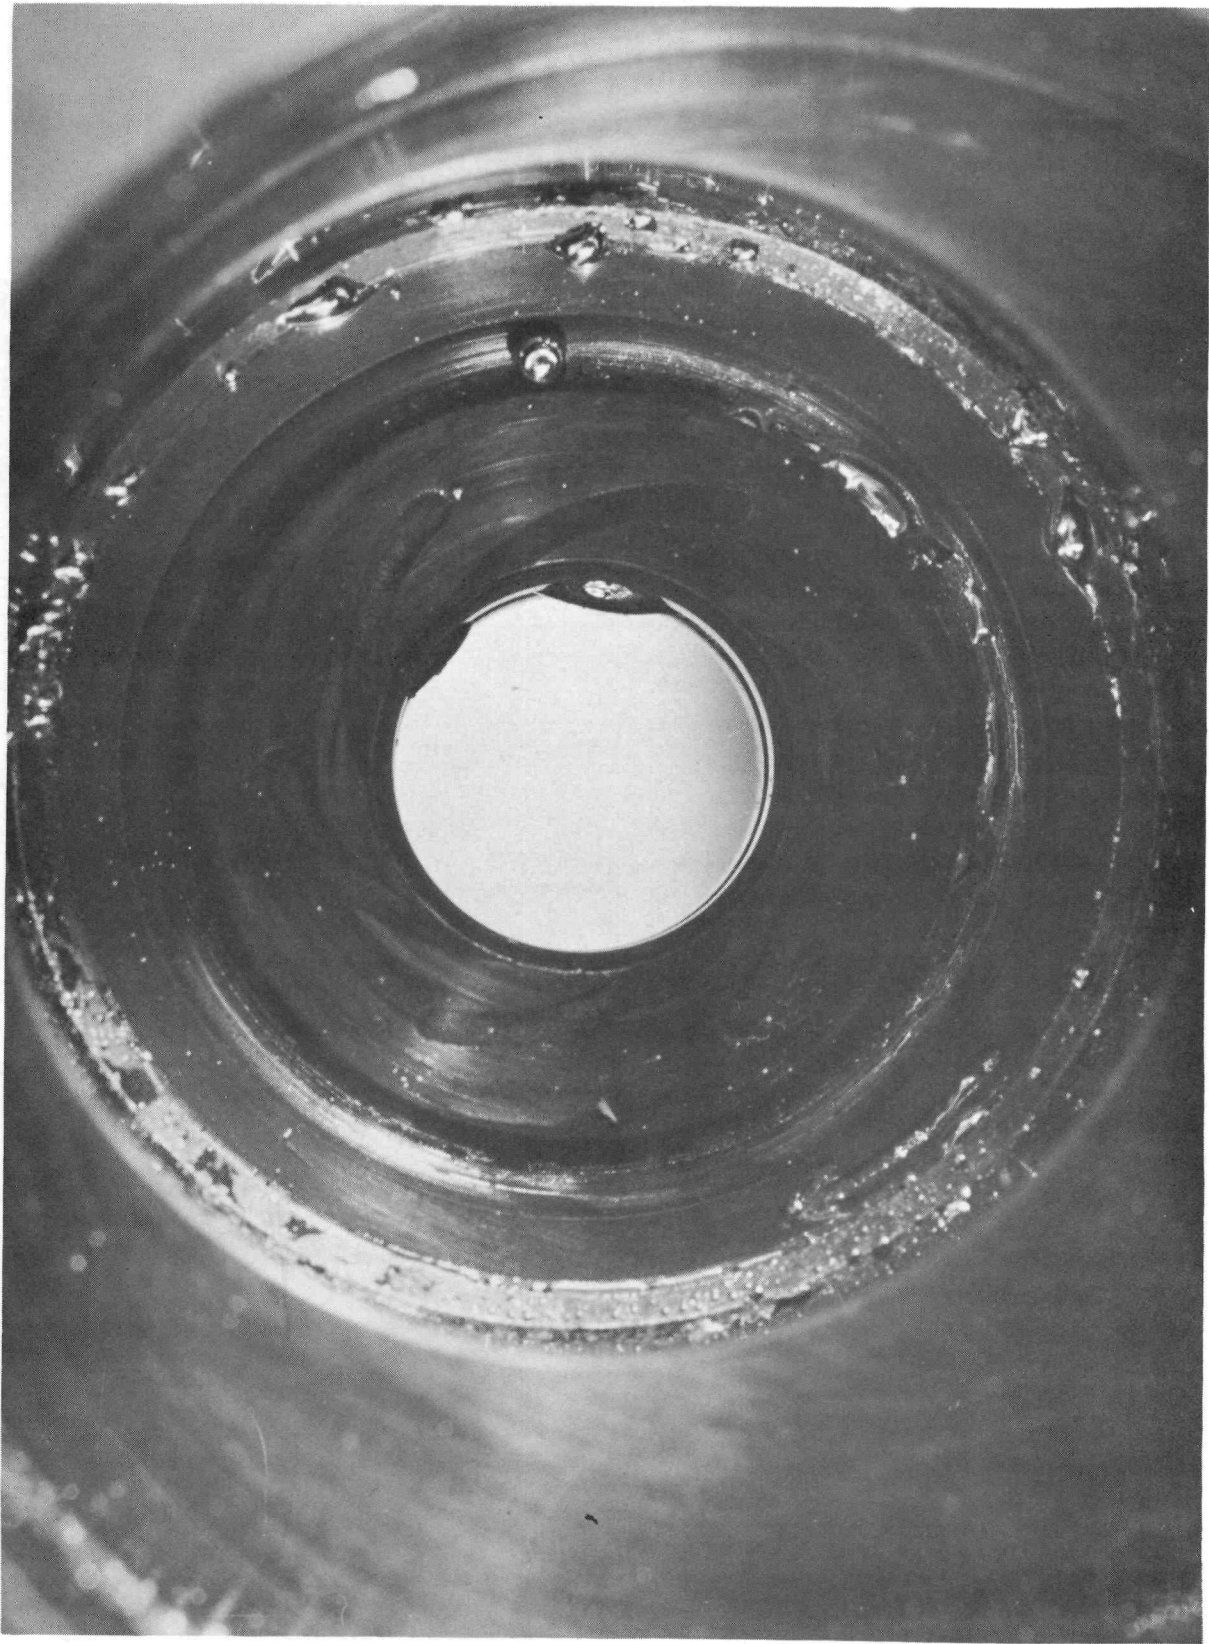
Spiral Groove Thrust Bearing After 875 Hours
